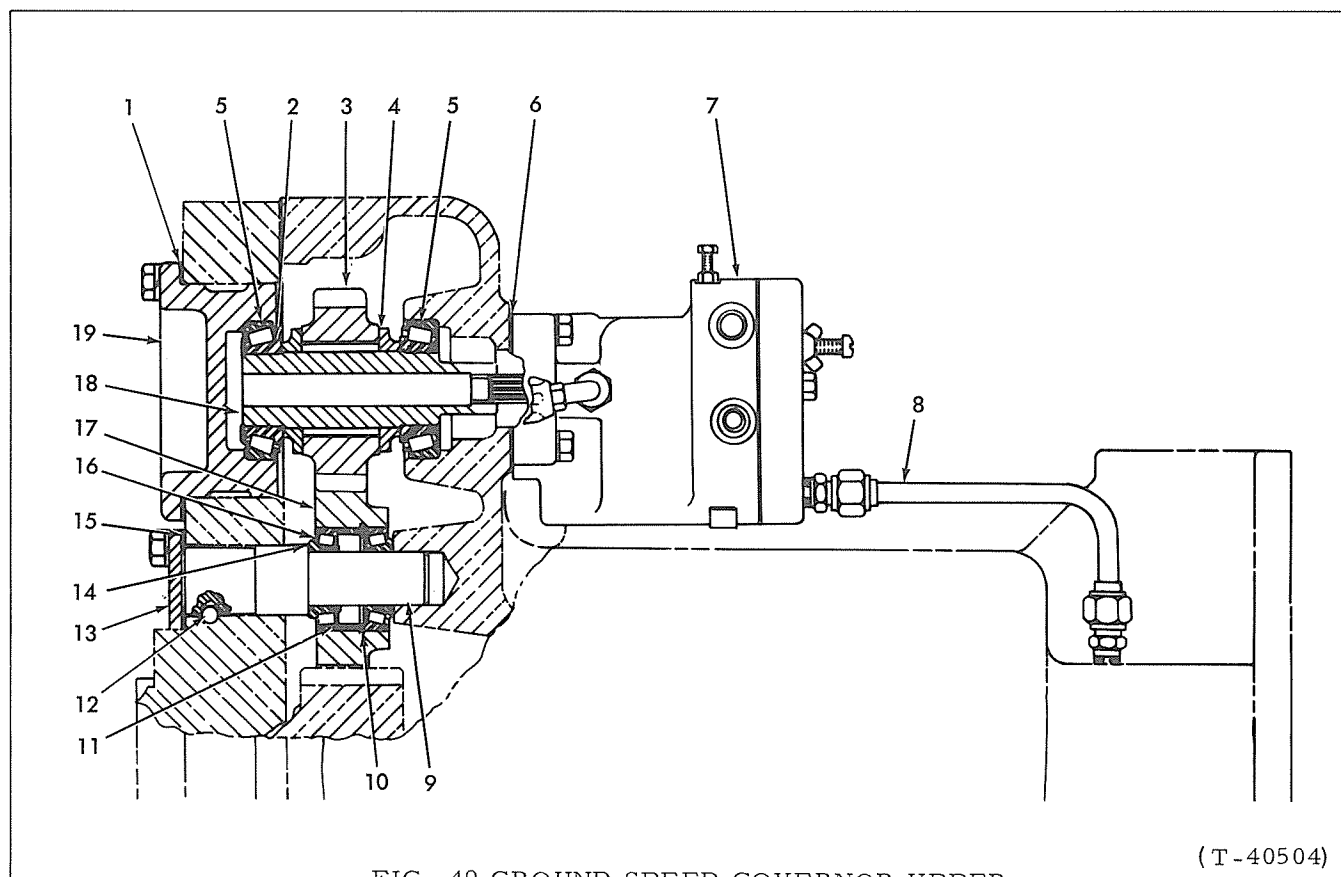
GROUND SPEED GOVERNOR UPPER AND LOWER DRIVE SHAFT ASSEMBLIES
